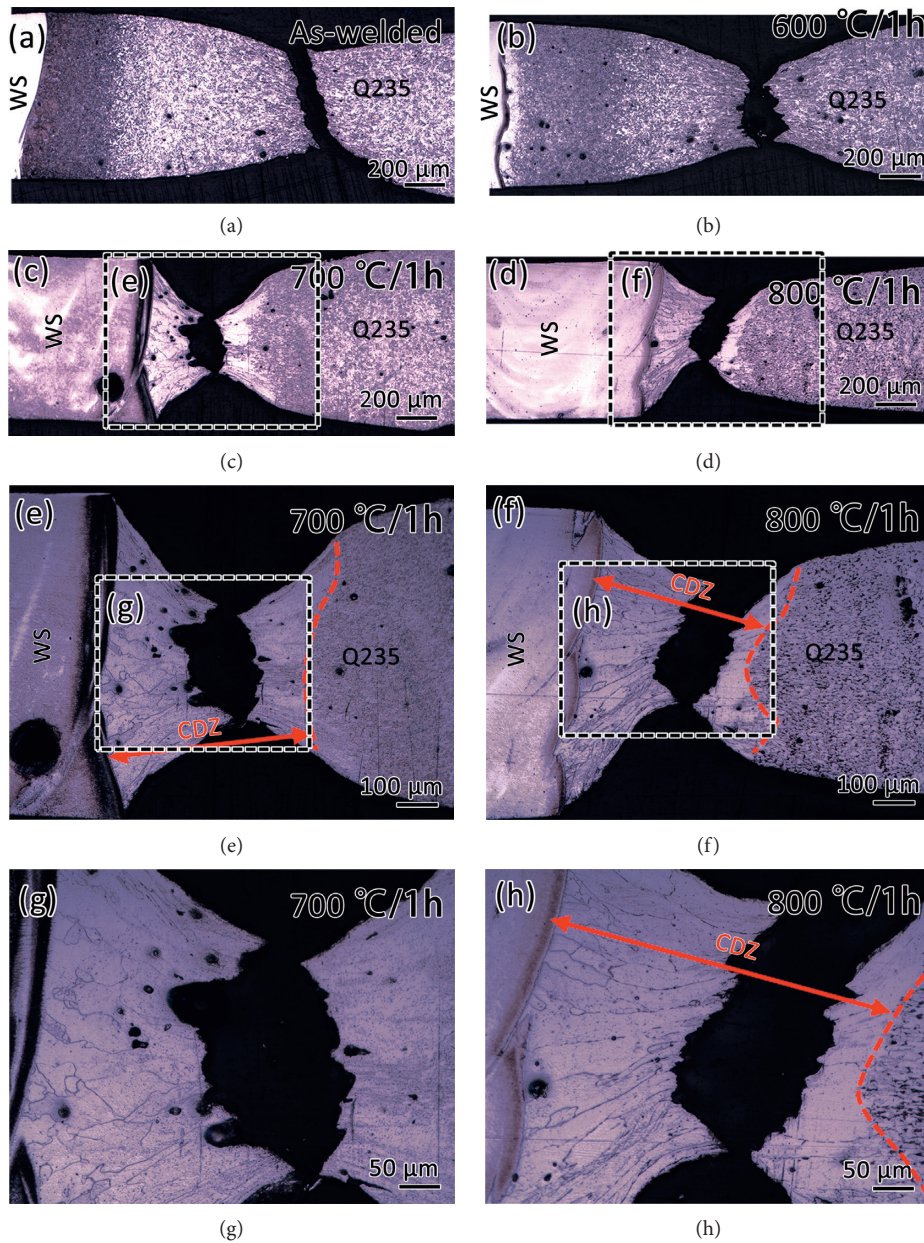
(a) Fractured as-welded joint; (b) fractured joint heat-treated at 600°C; (c, e, g) fractured joint heat-treated at 700°C; (d, f, h) fractured joint heat-treated at 800°C.
